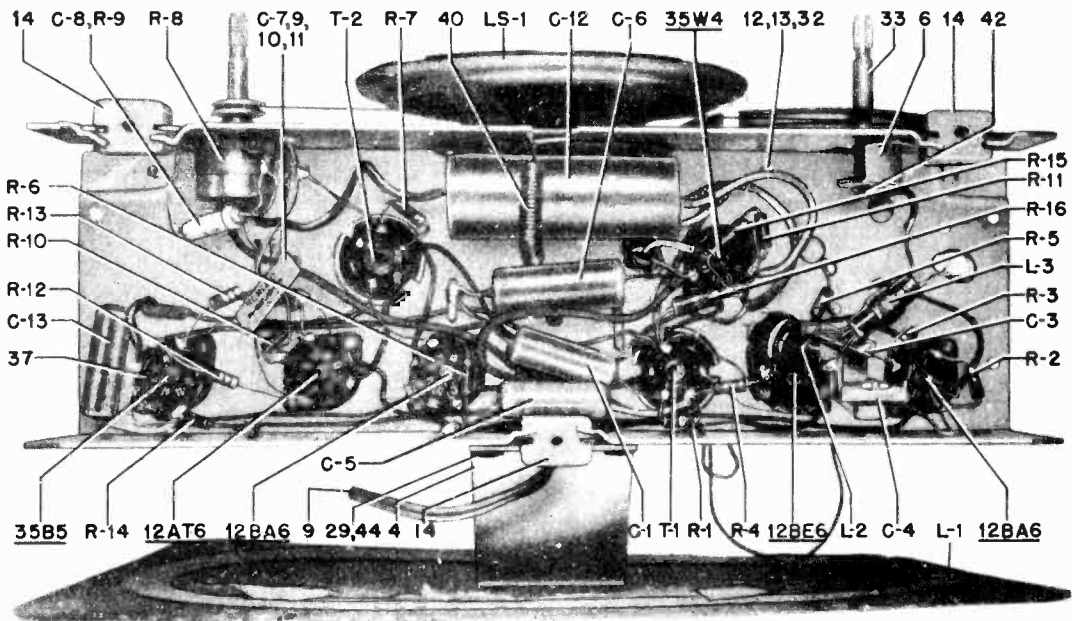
PARTS LOCATION - BOTTOM VIEW
